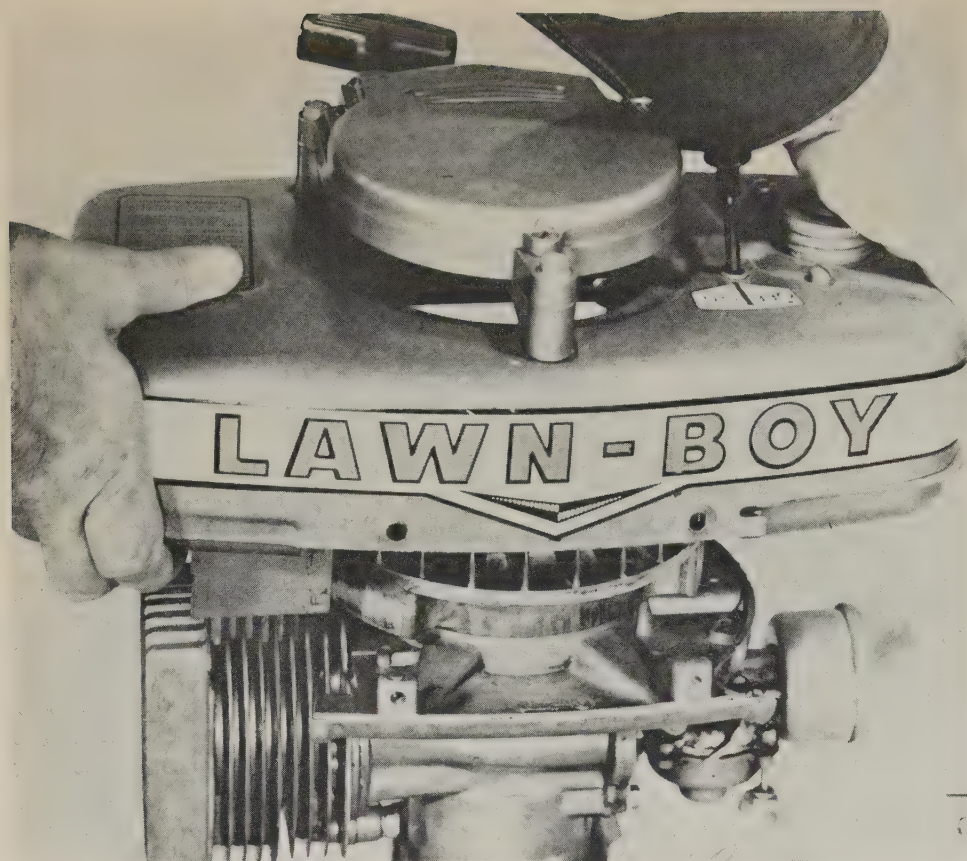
Removing engine shroud, gasoline tank, and starter as an assembly. (Lawn Boy Division Outboard Marine Corporation).
